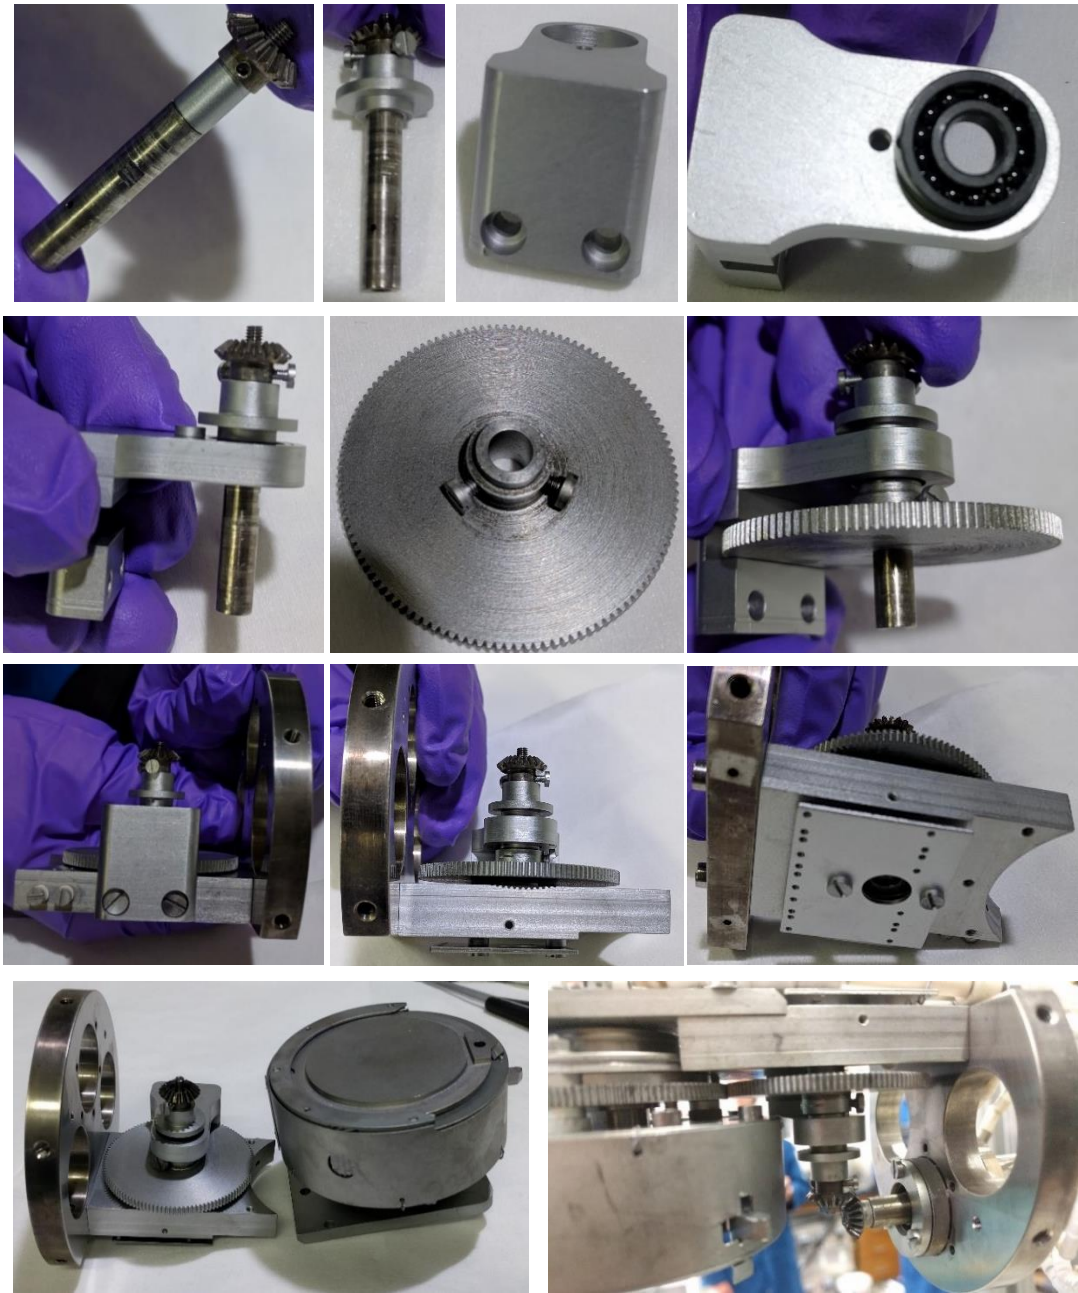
The step-by-step construction of manipulator with modified parts is continued here showing the gears for in-plane rotation assembly.
